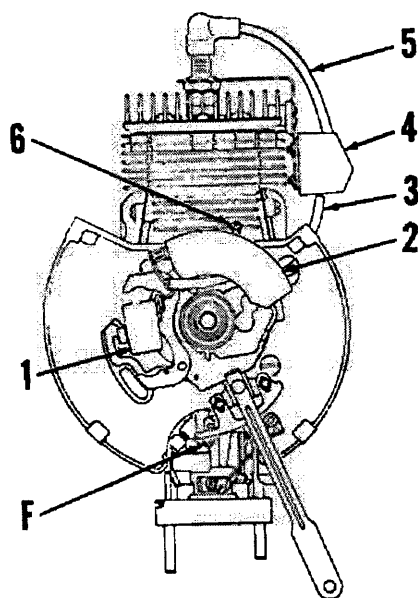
View of the solid state ignition components with flywheel removed.
